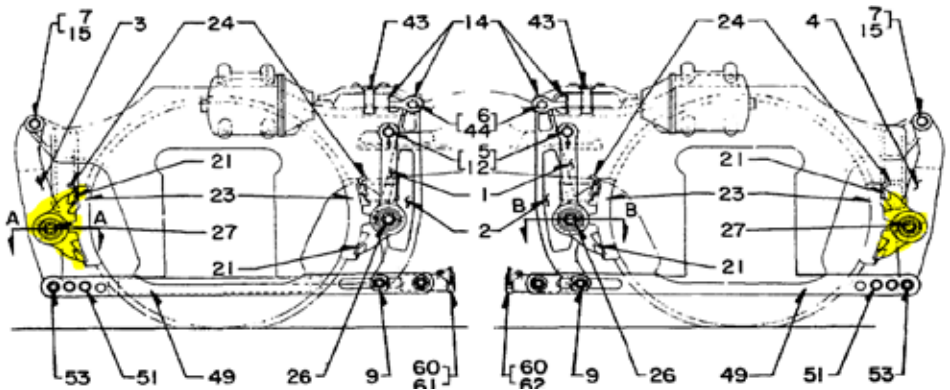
GP Clasp Truck Assembly, Dead-Lever Brake Head locations (steel bushing mates with thermoplastic ferrule)
